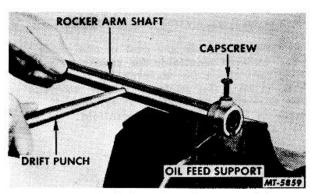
Turning Rocker Arm Shaft to Align Screw Holes
